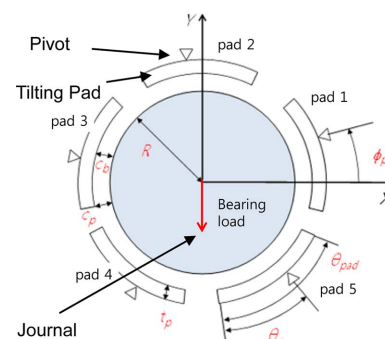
Schematic view of typical 5-pad tilting pad journal bearing [9].
